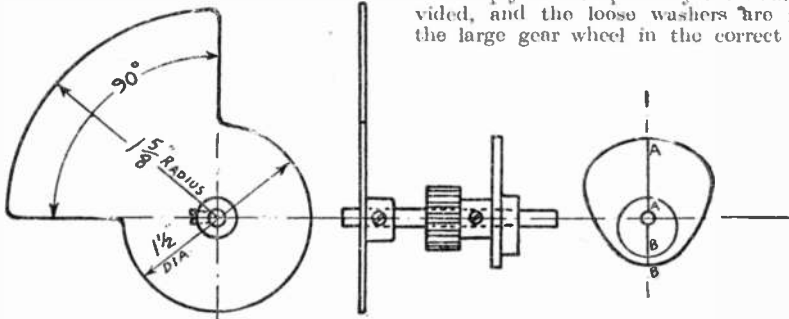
The shutter, pinion and cams assembled on the motion shaft.
